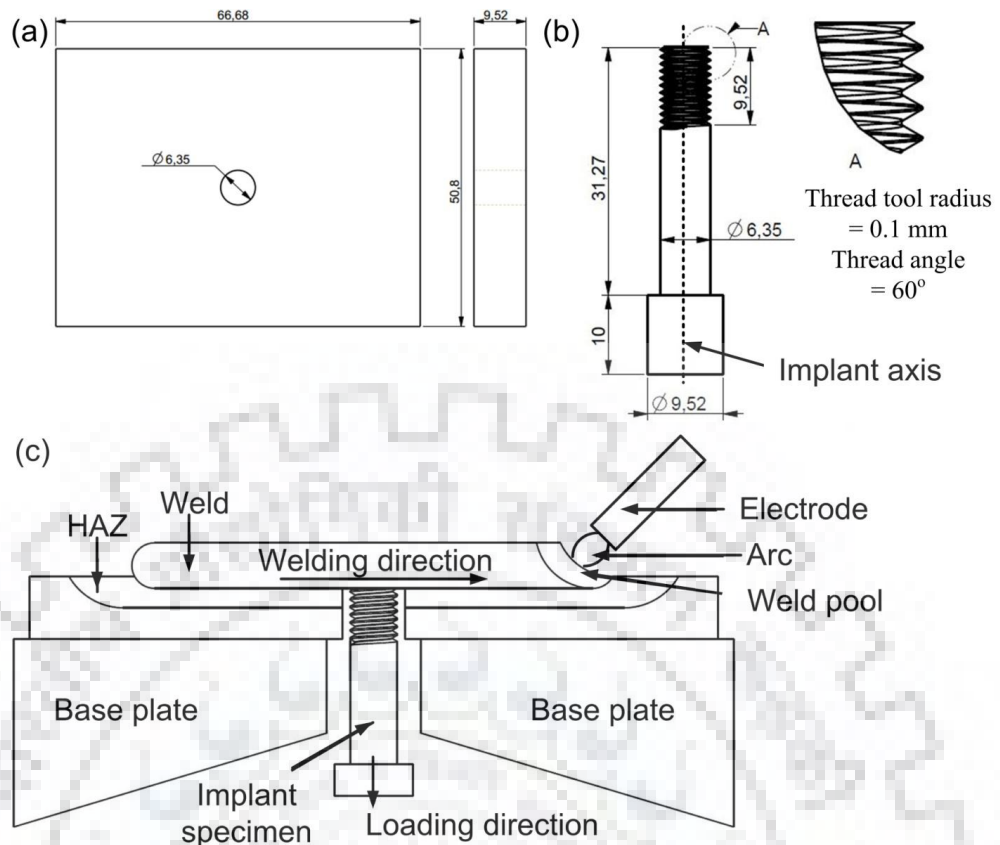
The schematic of implant test: (a) base plate, (b) implant specimen, and (c) test assembly
